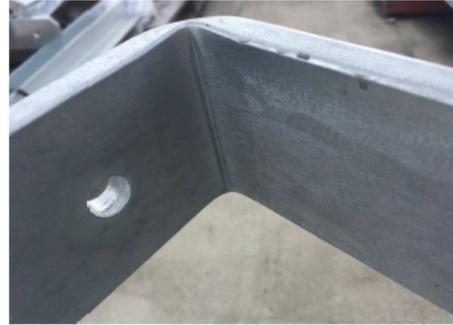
Previous 32.34.58 bracket with tighter bending radius.
